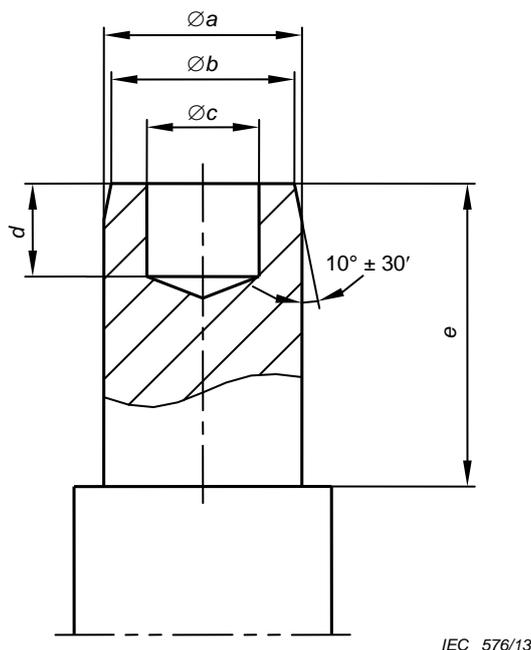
Gauge for outer contact of connector with pin-centre contact
